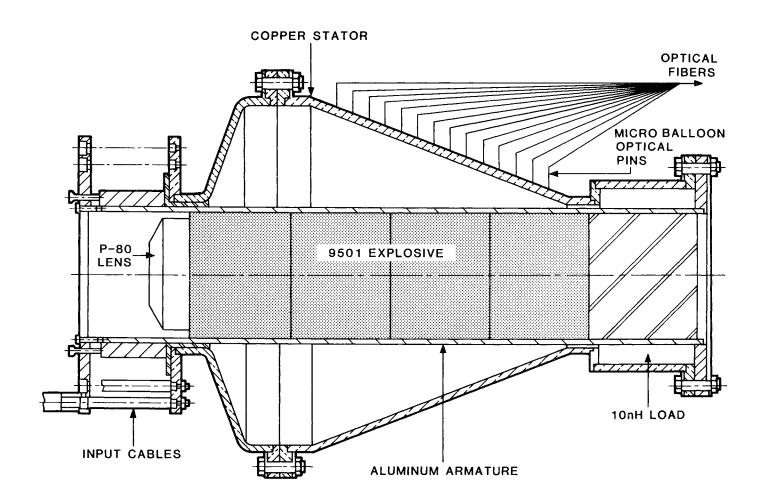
Simplified drawing of the coaxial generator used in the tests.
